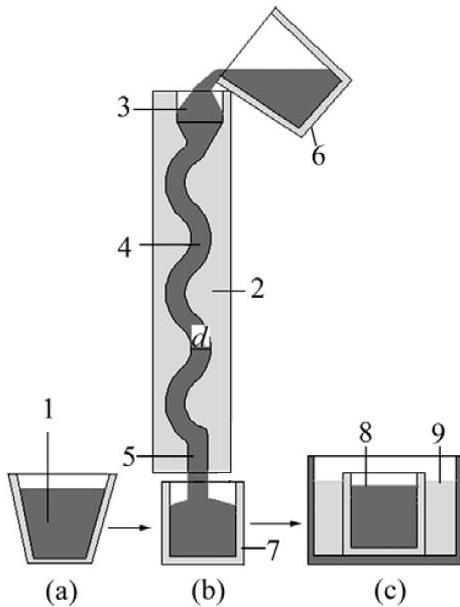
Schematic diagram of preparing semi-solid ZL101 aluminum alloy slurry by serpentine channel: (a) Melt; (b) Preparation of semi-solid slurry; (c) Cooling. 1—K-type thermocouple; 2—Serpentine channel; 3—Pouring cup; 4—Serpentine bend; 5—Diversion pipe; 6—Melting crucible; 7—Collective crucible; 8—Slurry; 9—Cold water
